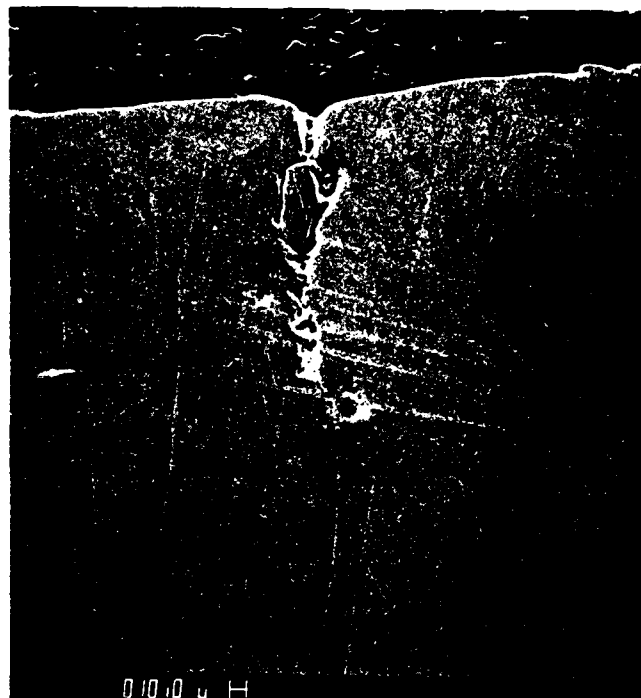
4340 STEEL EXIT RING (F II) SHOWING EXTENSIVE FATIGUE CRACKING AFTER 19 SHOTS (SEM)
